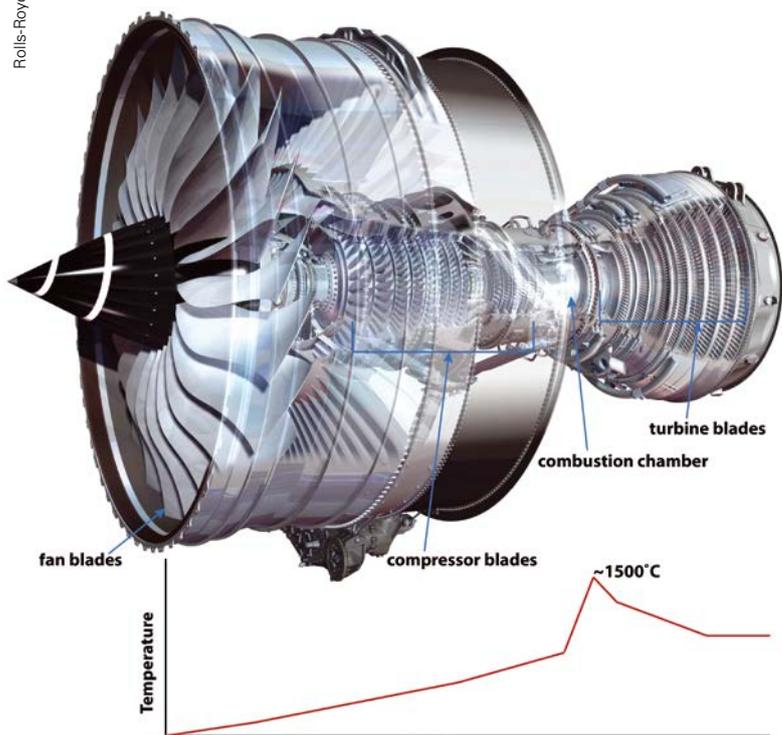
The parts of a jet engine; the turbine blades must withstand the highest temperatures.
